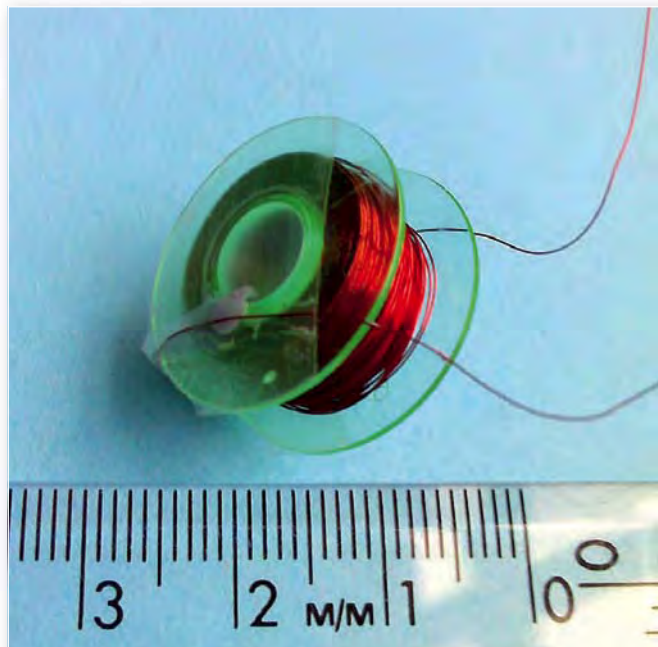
A coil that has been wound with multiple layers. It has been wound on a sewing-machine feeder bobbin.
